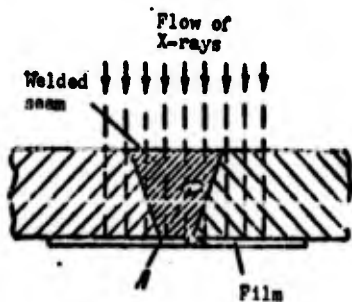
Diagram of X-ray control of a welded seam.
